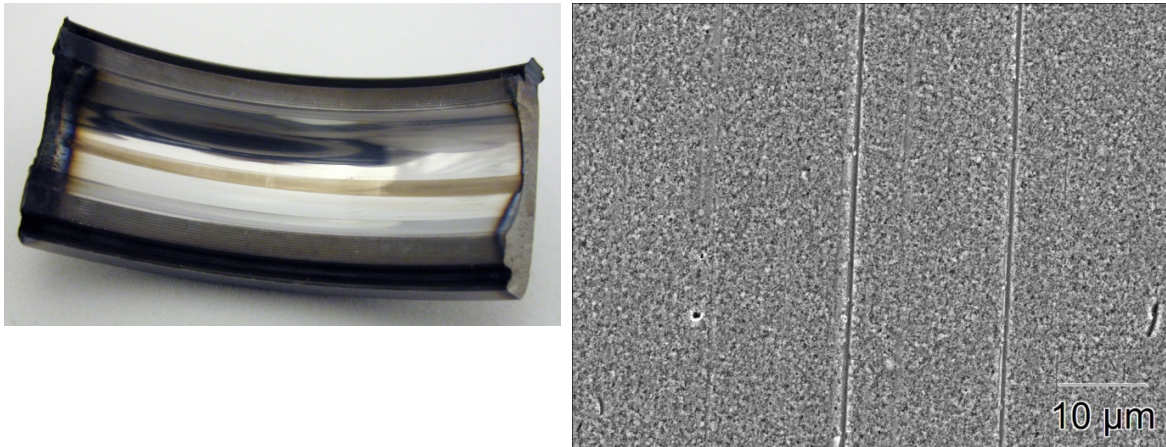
Visual inspection of outer race of DE bearing (left): the grey trace caused by EDM bearing currents is clearly visible. Electron microscope picture of grey trace on bearing outer ring (right).
